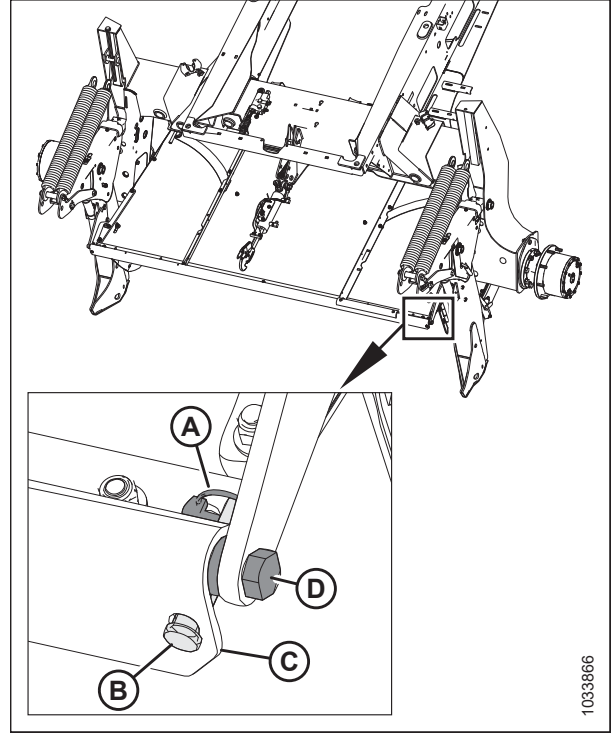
Forming Shield Secured to Front of Windrower Legs
